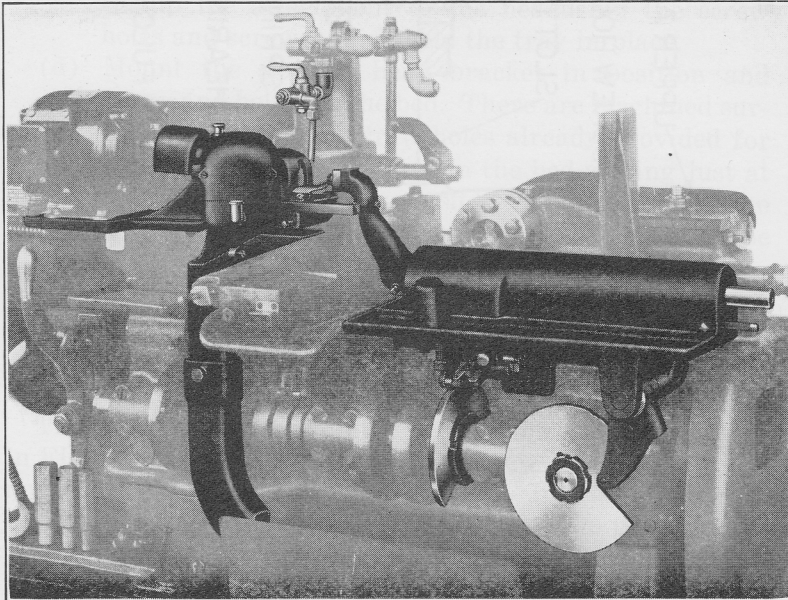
Screw Slotting Attachment (No. 0 Size Machine)
